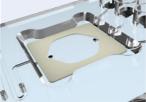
Double-sided adhesive tape gasket – rhombic chamber
